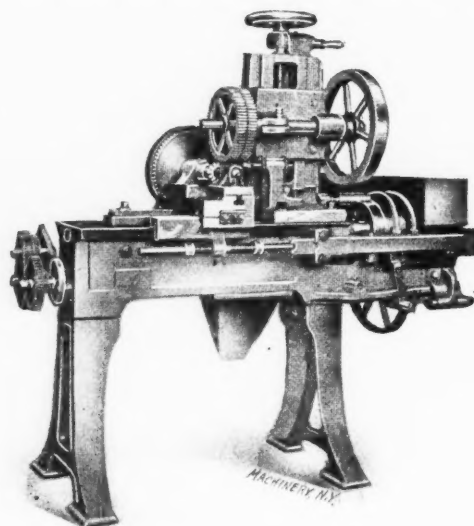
The Wilkinson Automatic Machine for Small Gears.
